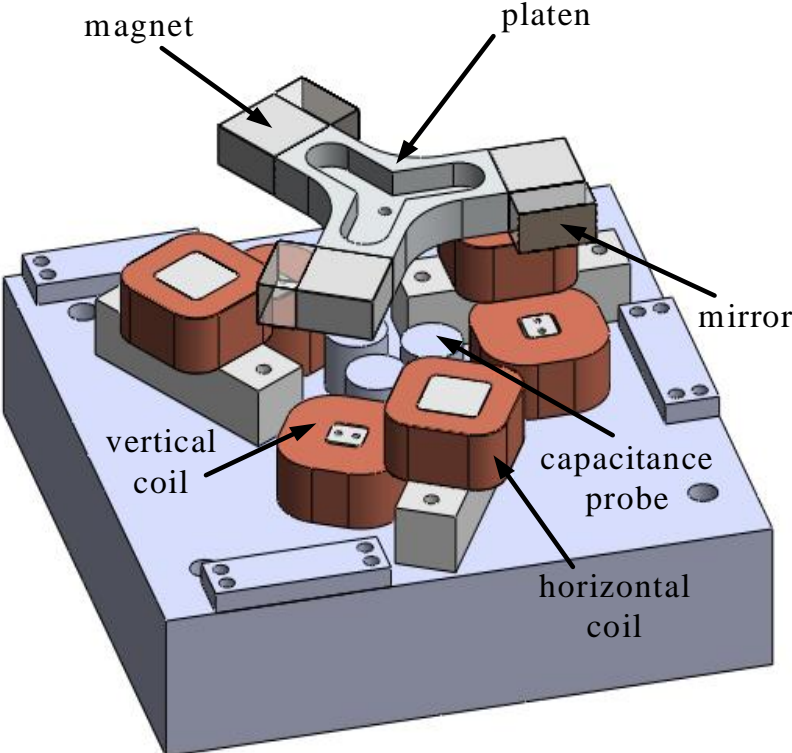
Exploded view of Y-shaped maglev stage [38].
